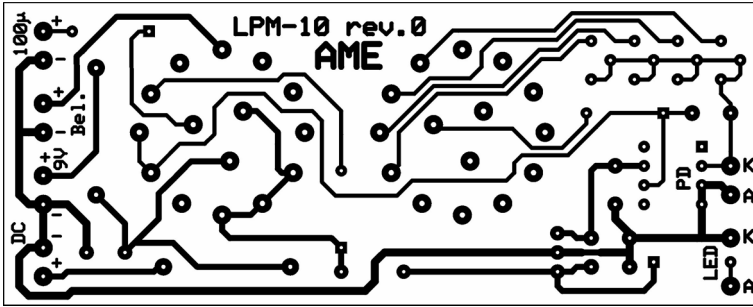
Printed circuit board layout for the laser output meter (DG6RBP-004).
